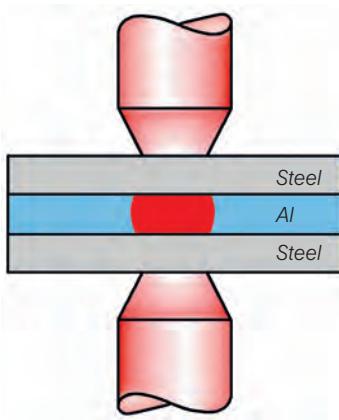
Welding of aluminium directly to steel with resistance heating. Bonding between the materials have been obtained with well-adapted welding parameters.
